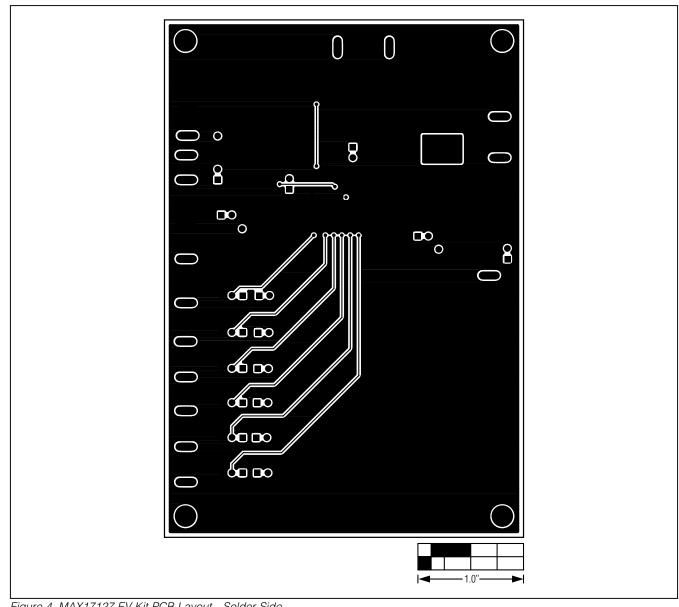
MAX17127 EV Kit PCB Layout—Solder Side
